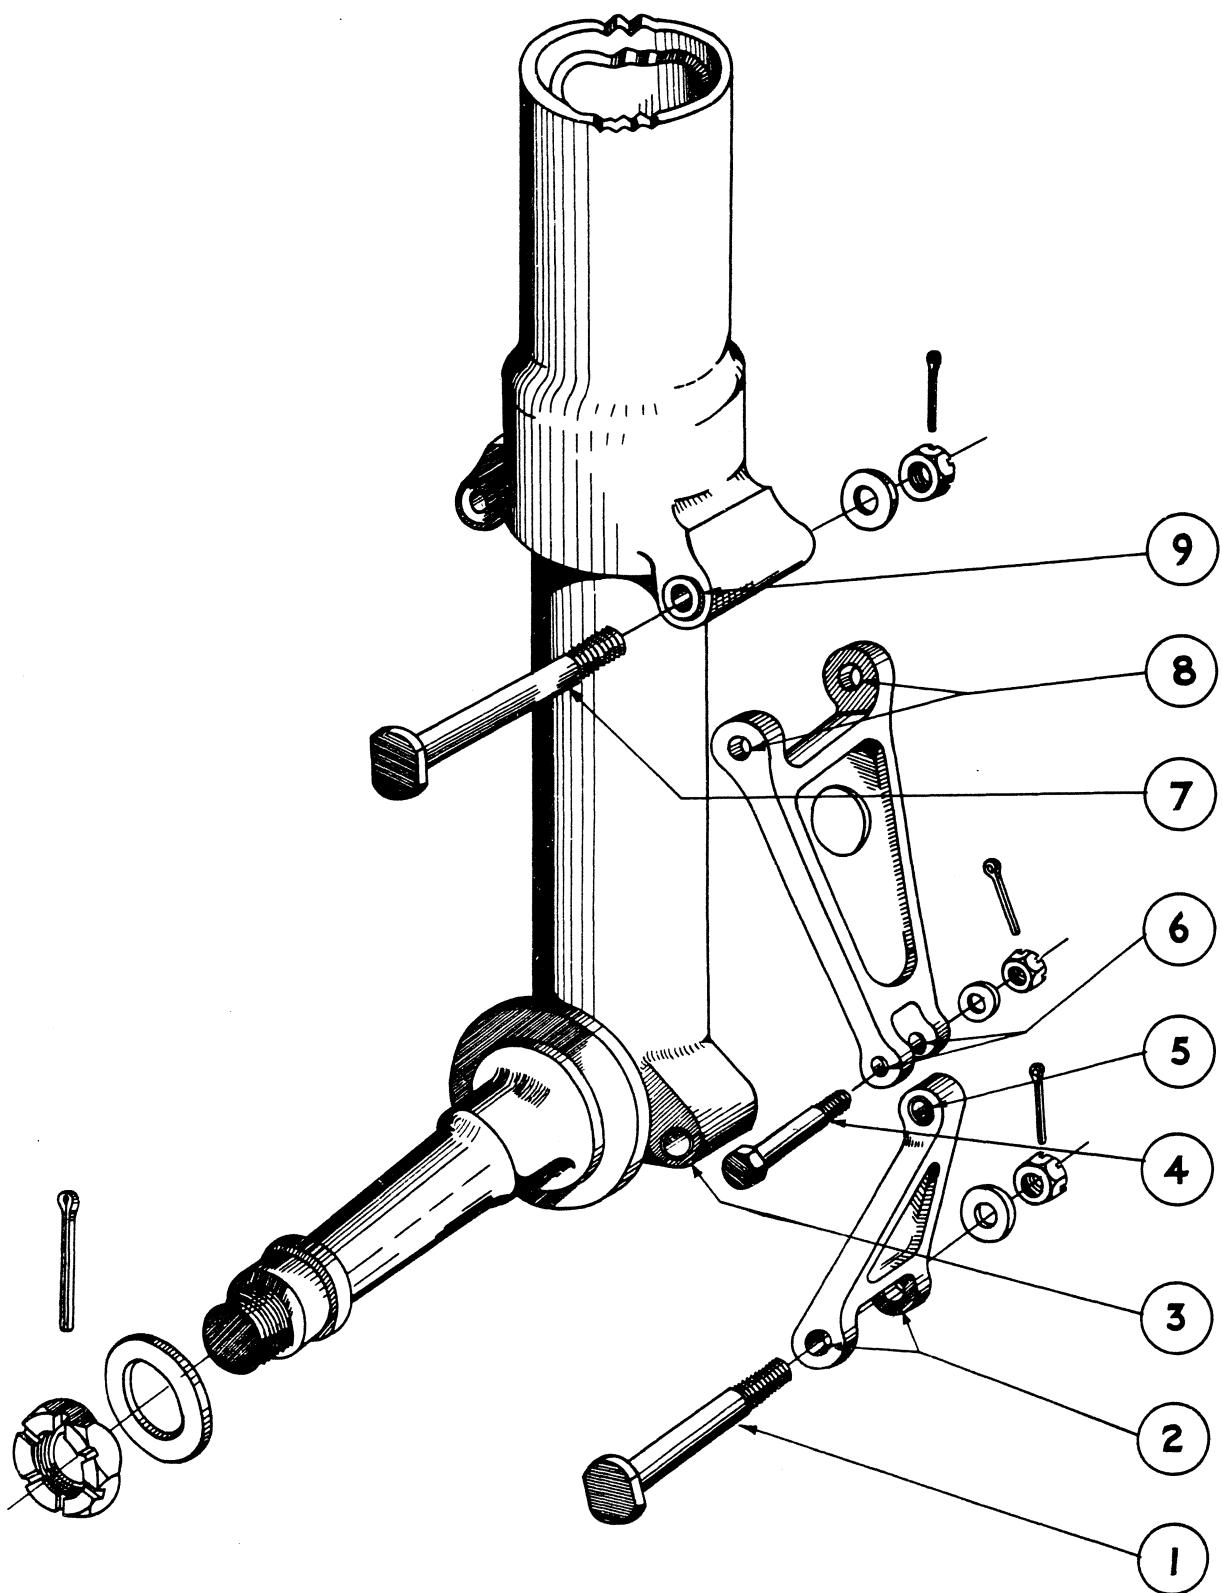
/2 EXPLODED VIEW OF UNDERCARRIAGE LOWER SECTION
